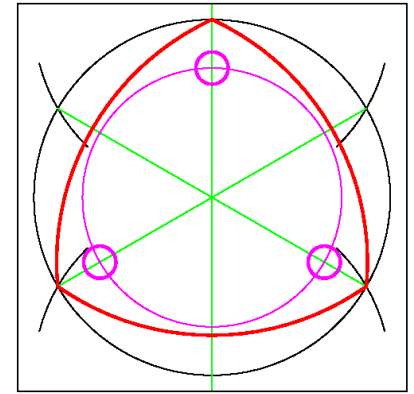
End of Blank Completely Marked and Ready for the Lathe.
